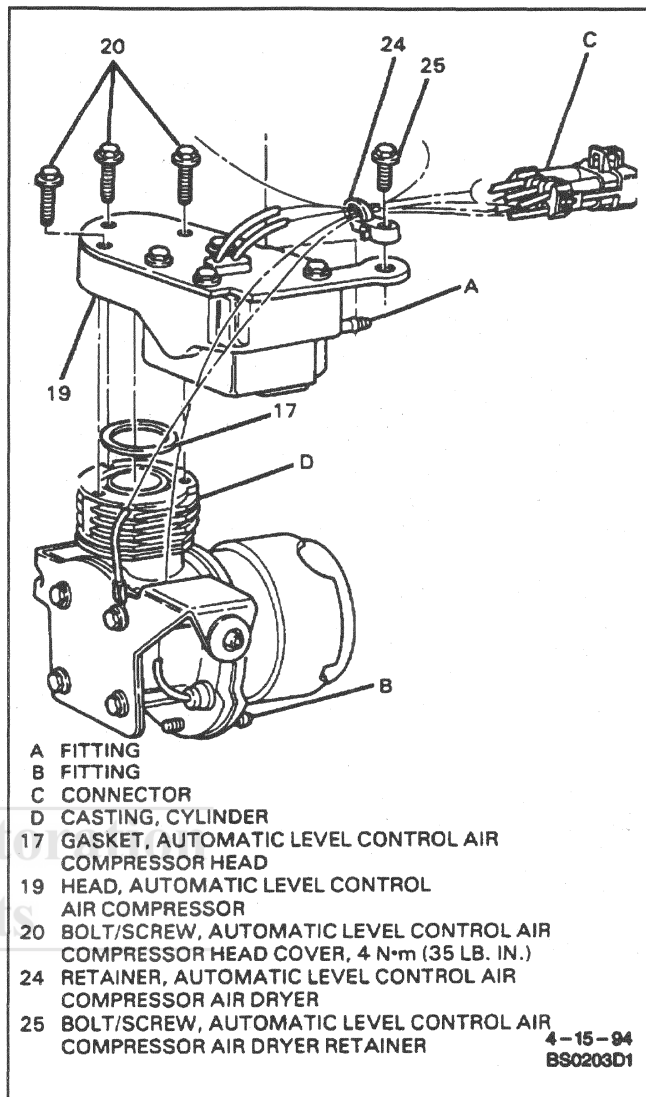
Replacing Automatic Level Control Air Compressor Head
